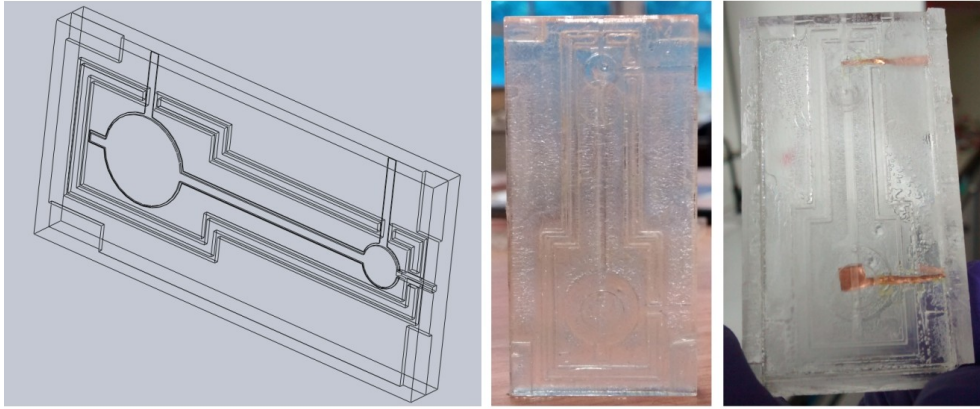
3D CAD view of an assembled mechanically bonded COP fluidic chip (left) and two of these same chip after fabrication & assembling (right)
